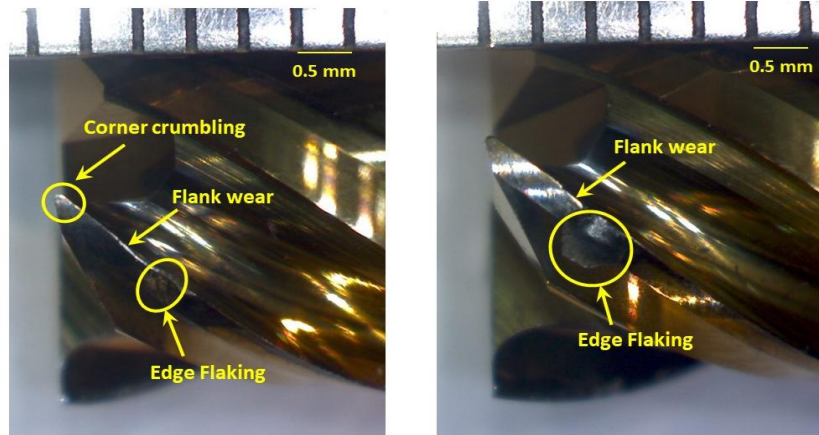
Multiple modes of tool failure on two different cutting edges of a solid carbide endmill resulting from machining mild steel.
